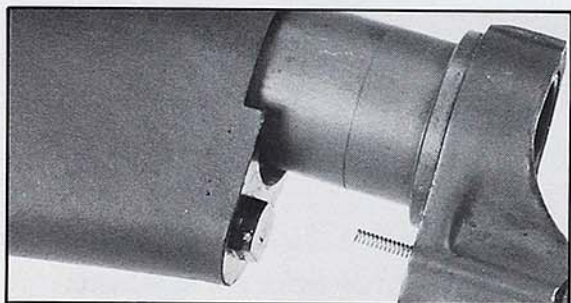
REMOVAL OF BUTTSTOCK AND DISASSEMBLY OF DETENTS AND TAKEDOWN PIN
